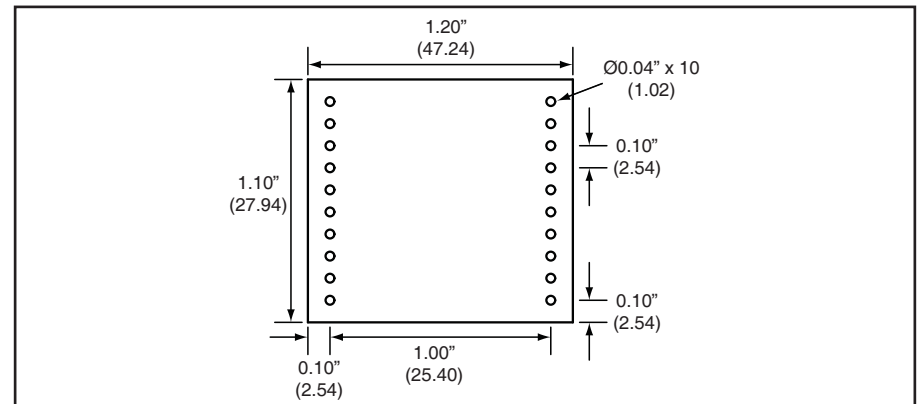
MDEV-GPS-SR-DB PCB Layout Dimensions
